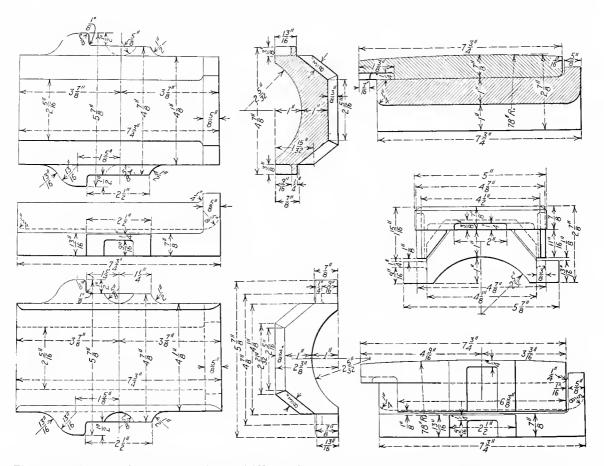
M. C. B. Standard Bearing and Wedge for 4¼ in. by 8 in. Journal. (M. C. B. Sheet 6.) The Journal Box Lid for This Size Journal is the Same as That Shown in Fig. 2677.
